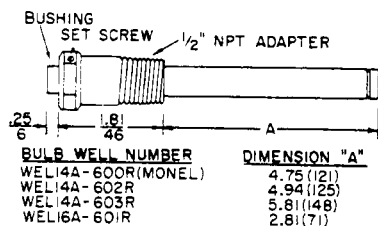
Bulb well for liquid immersion applications where a temperature bulb may be removed without draining tank.
